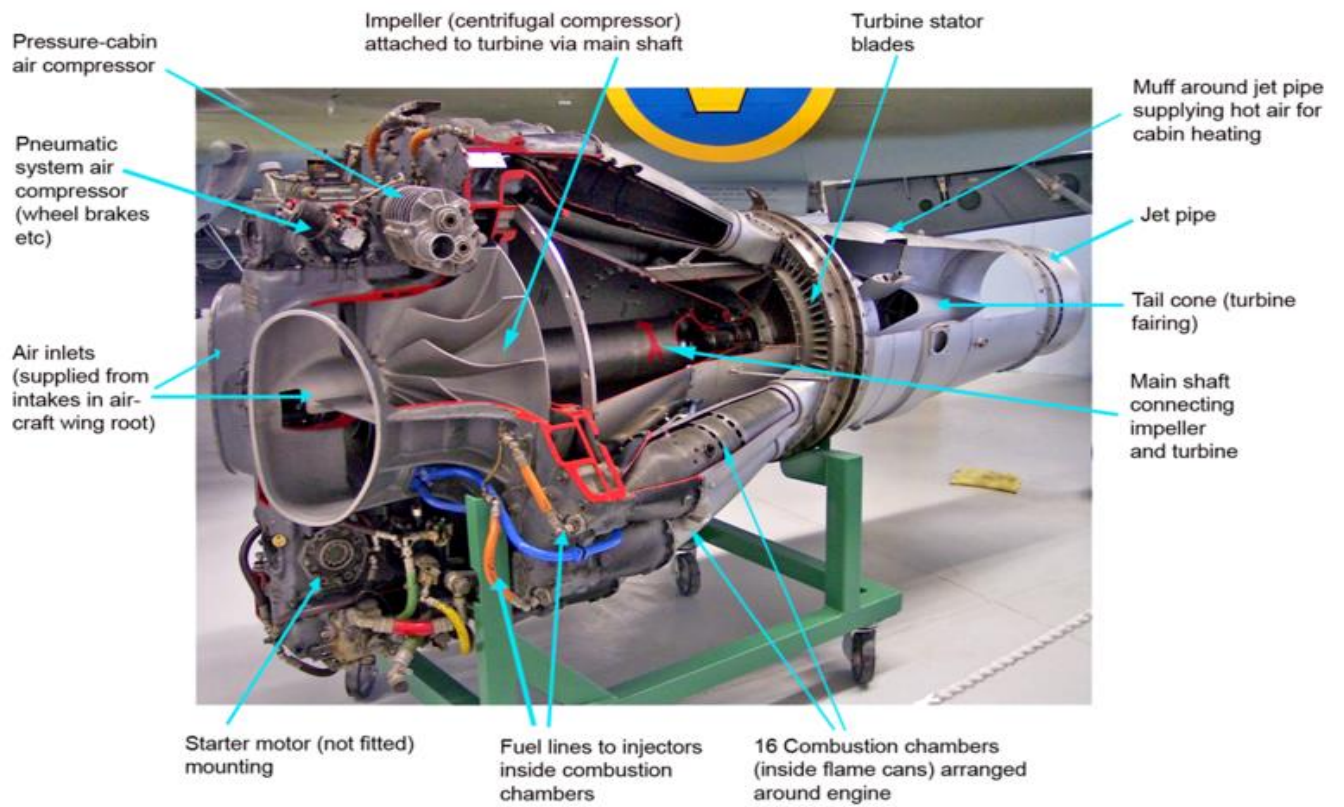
Jet engine cutaway showing the centrifugal compressor and other parts.
